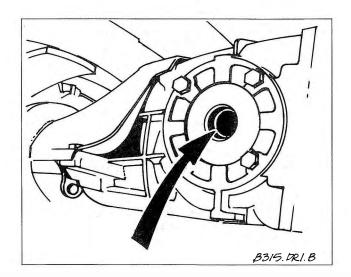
Drive flange snap ring (arrow) to be removed from differential housing.
